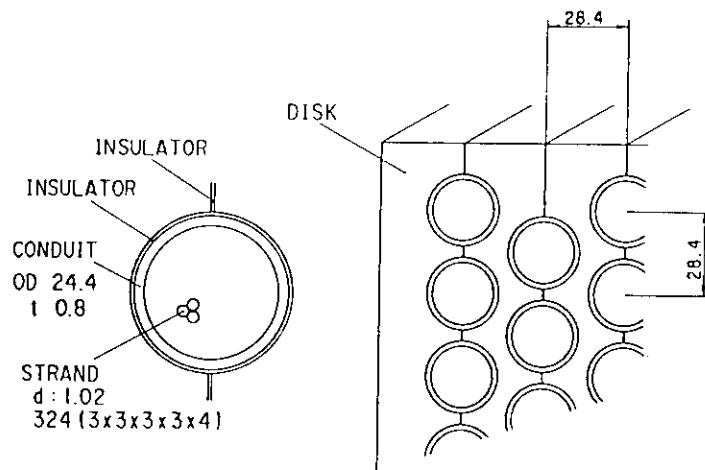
Cross-sectional view of the Advanced Disk type conductor and winding.
